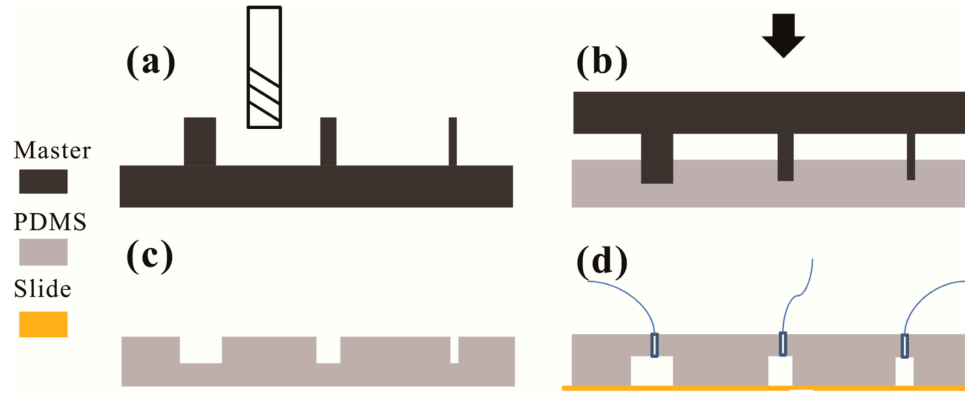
Machining of microfluidic master mold for fabricating microfluidic device. (a) positive master mold is milled; (b) mold is pressed into partially cured PDMS; (c) cured PDMS is separated from mold; (d) PDMS layer is bonded to glass substrate to enclose channels [11]
